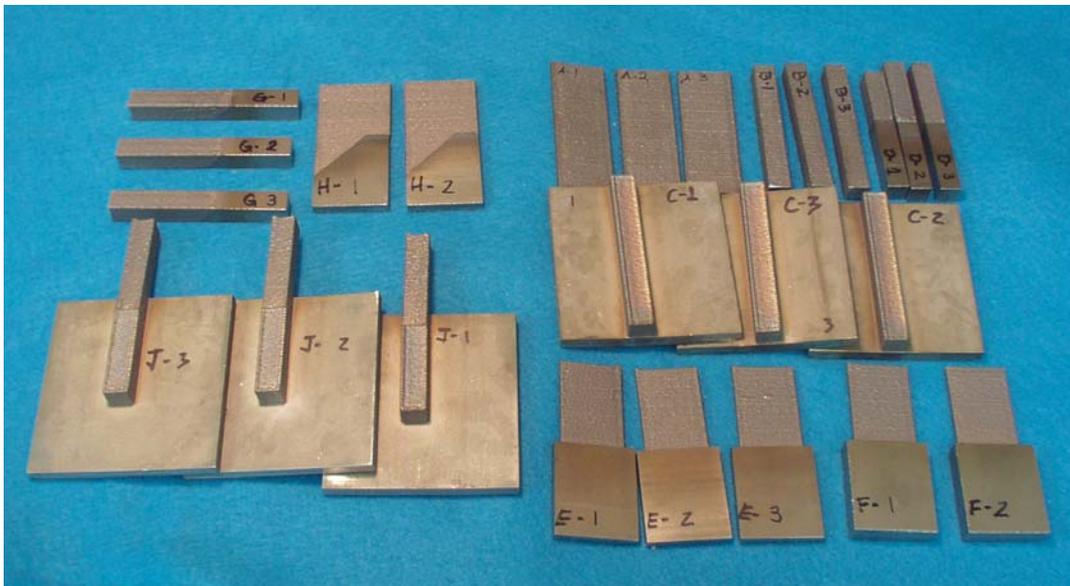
LENS Deposited Sample Types A-J for Machining Into Tensile Specimens.
